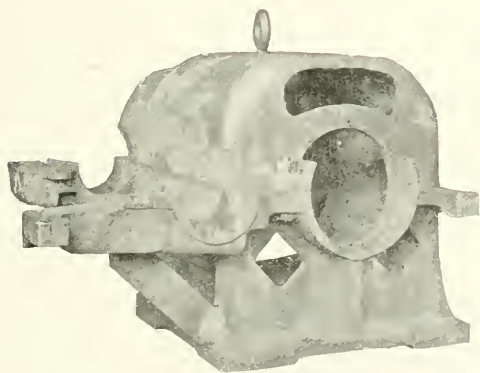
MOTOR FRAME CASTING WITH NEW STRUT IN PLACE
